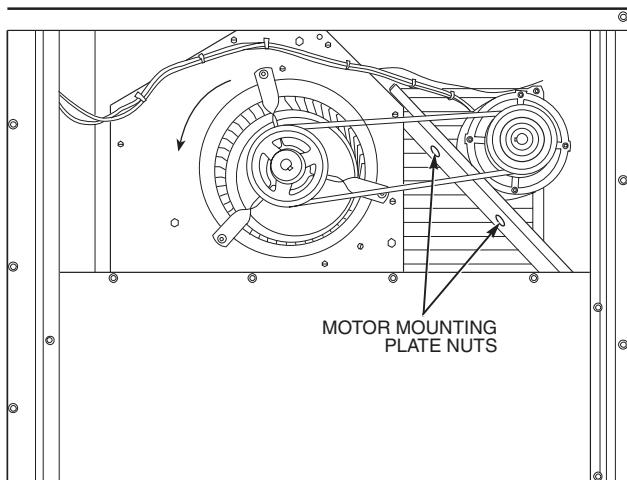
Typical Belt-Drive Motor Mounting for Sizes 090,091,102,103
